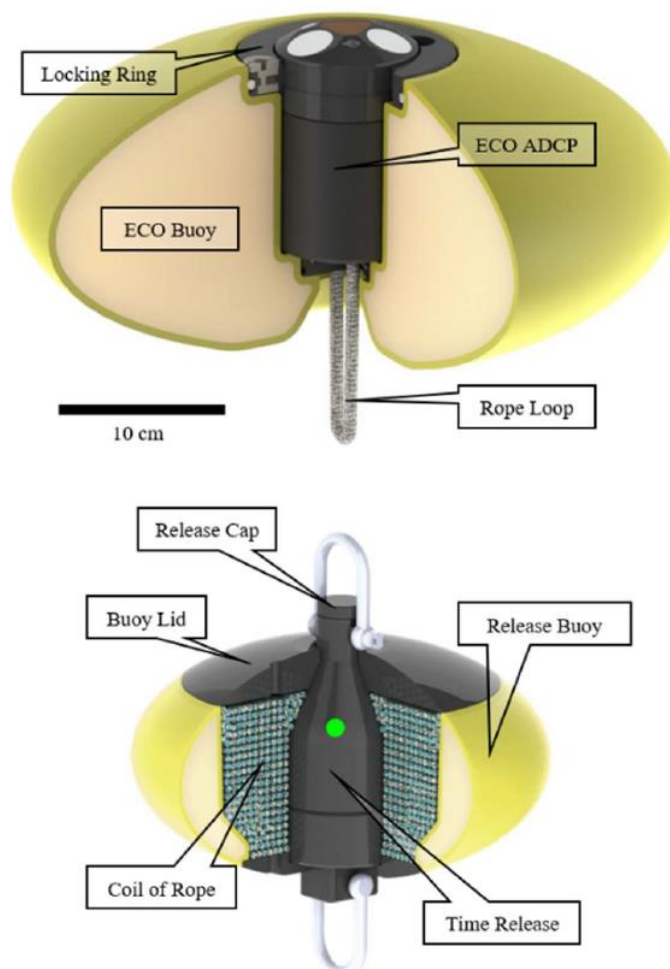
ECO buoy (top) and Release buoy (bottom) cutaway view showing main components. With the ECO ADCP installed, the top buoy has 11 kg of buoyancy and with the Release installed, the bottom buoy has 3 kg of buoyancy. Drawings are to scale and a 10 cm marker is shown for reference. All exposed materials are non-corrosive.
